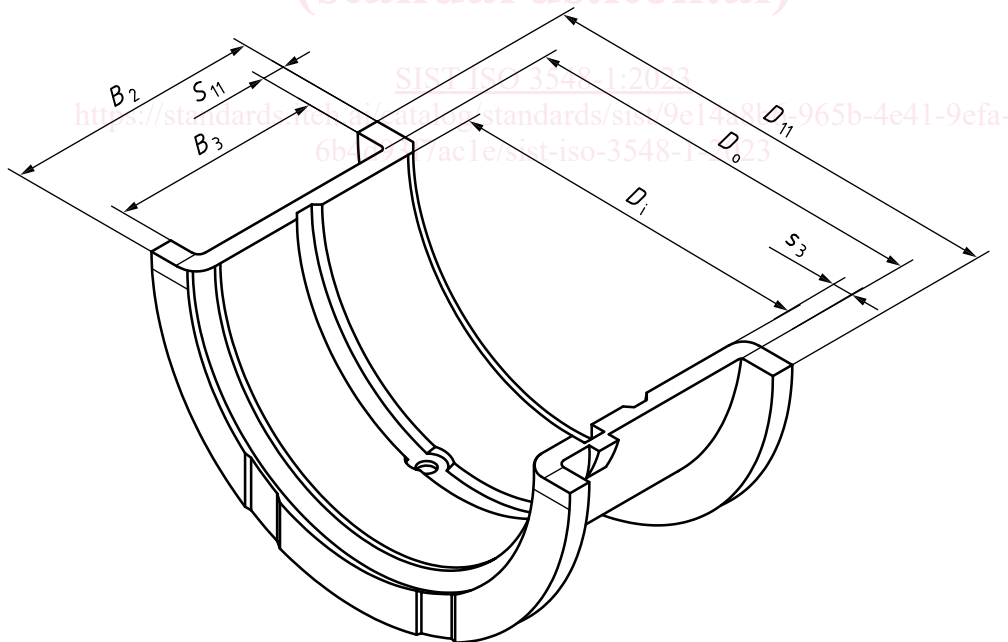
Flange half bearing, integral or assembled, excluding free spread
